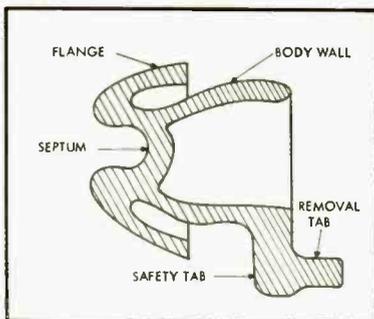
Cross-sectional view of V-51R Ear Defender.
